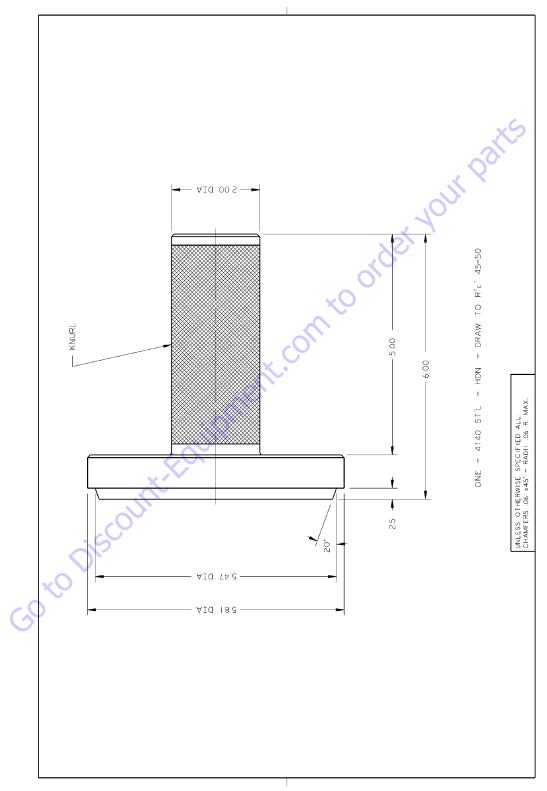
Assembly Tools - Bearing Cup Pressing - "A" & "B" Bearings
